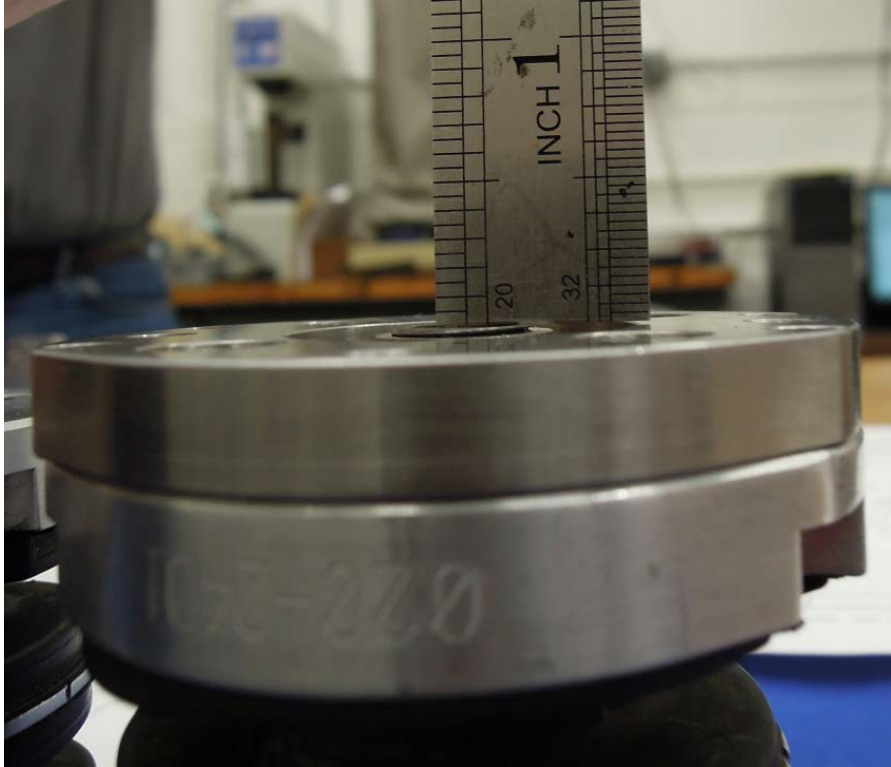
Original NPRM cable design. Depending on tolerance stack-ups, the cable assembly can protrude slightly beyond the neck-torso interface plate.
